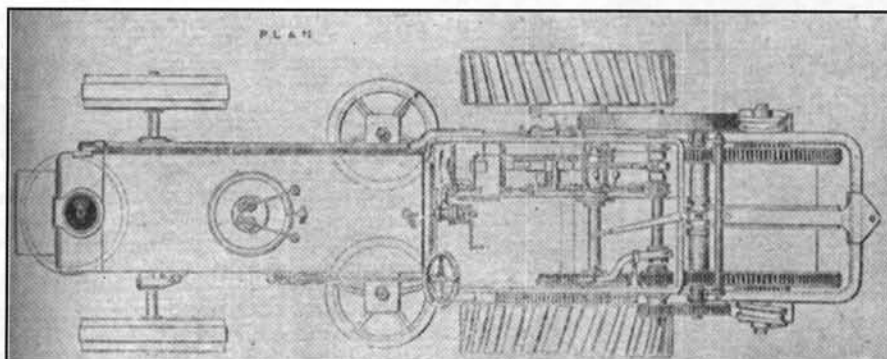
Line drawing showing plan of the engine in Fig. 30
